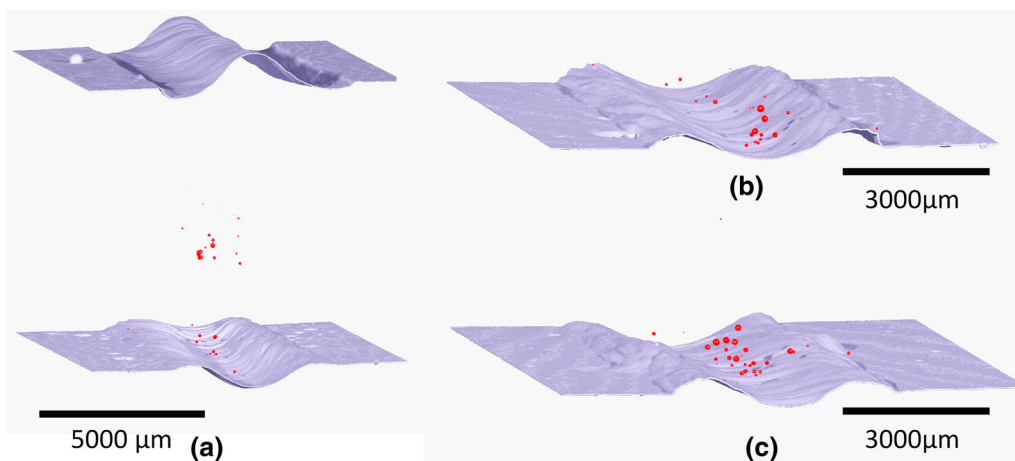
3D reconstructions of 12-mm sections of (a) L-0B and magnified view of the root side of (b) L-0.06 and (c) L-0.11B showing the porosity in the laser welds.
